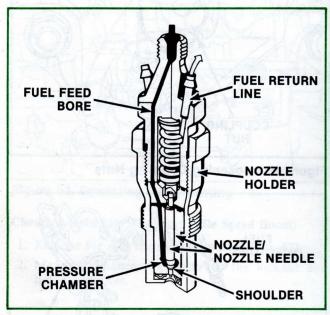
2.4L Fuel Injection Nozzle (9E527A)
